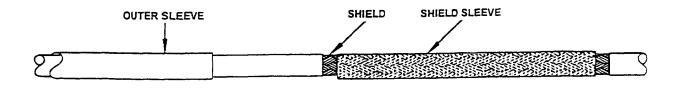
Single Shield Cable Repair with Solder Sleeve Primary Splice (Sheet 2)
